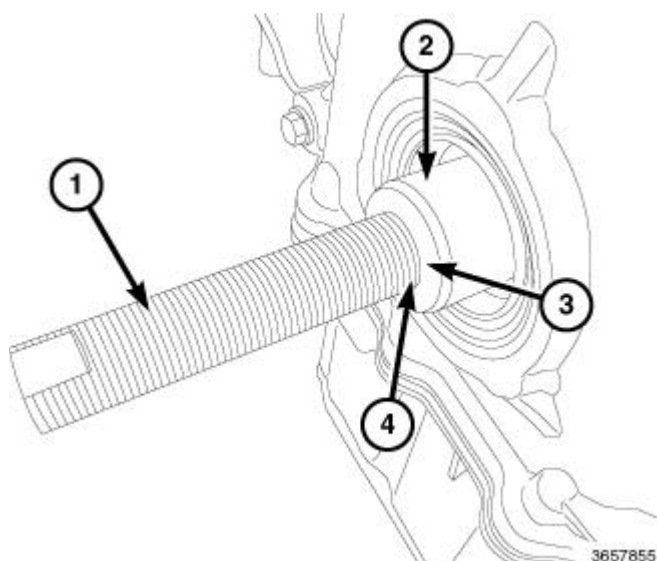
Installing Vibration Damper Onto Crankshaft Using Special Tool
